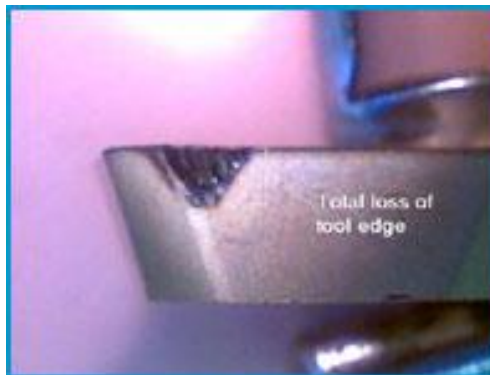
Photograph of Fracture [Courtesy: www.armg.com, 2011]
